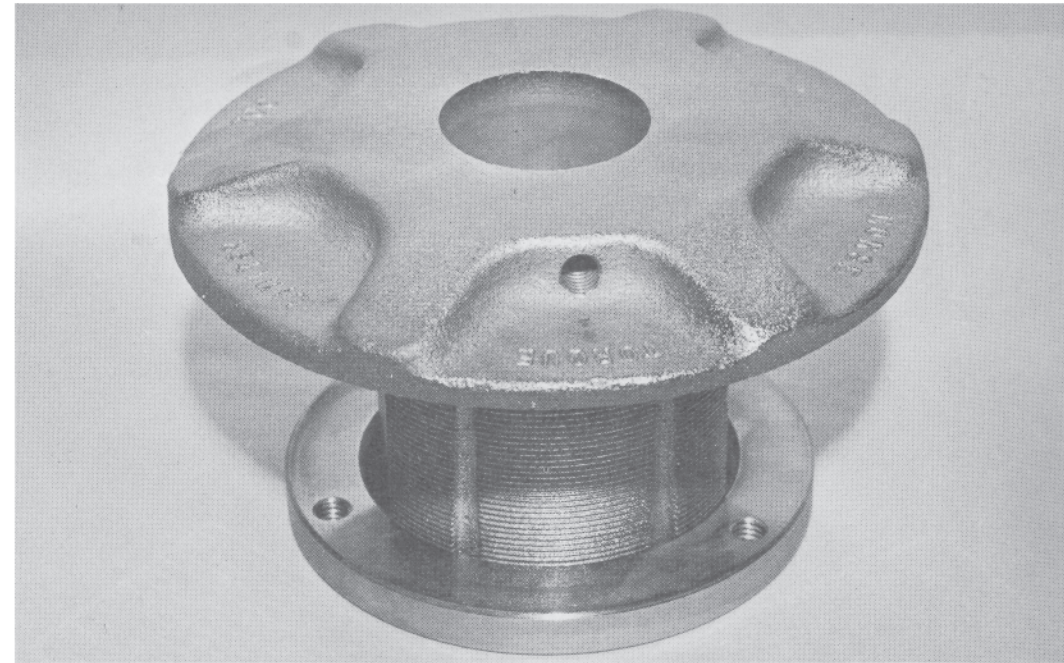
Illustration C — Zinc plated cast iron torque limiter assembly with iridescent chromate coating for indoor service on electric motor.
